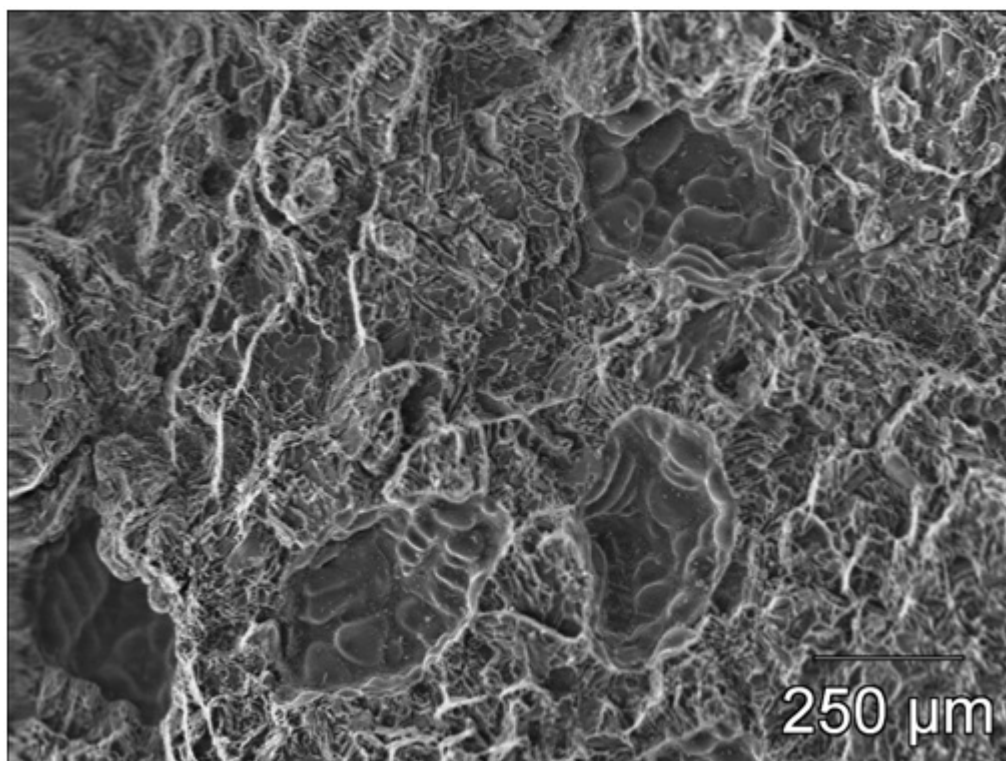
Fracture surface of as-cast 356-T6 tensile test specimen.
